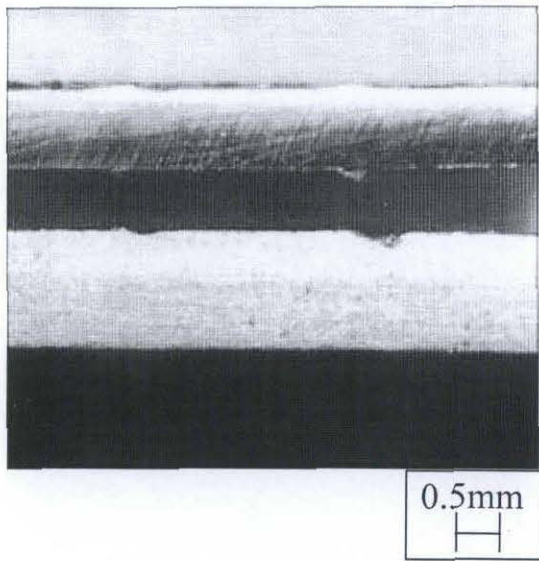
Tensile shear test specimens after testing of SPCC/A1050.
